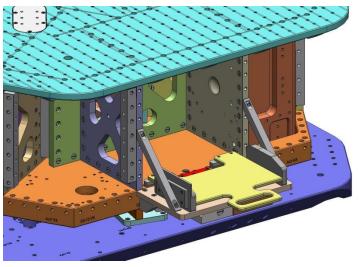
Install Sled Tool on Install Shelf, ready for use.
